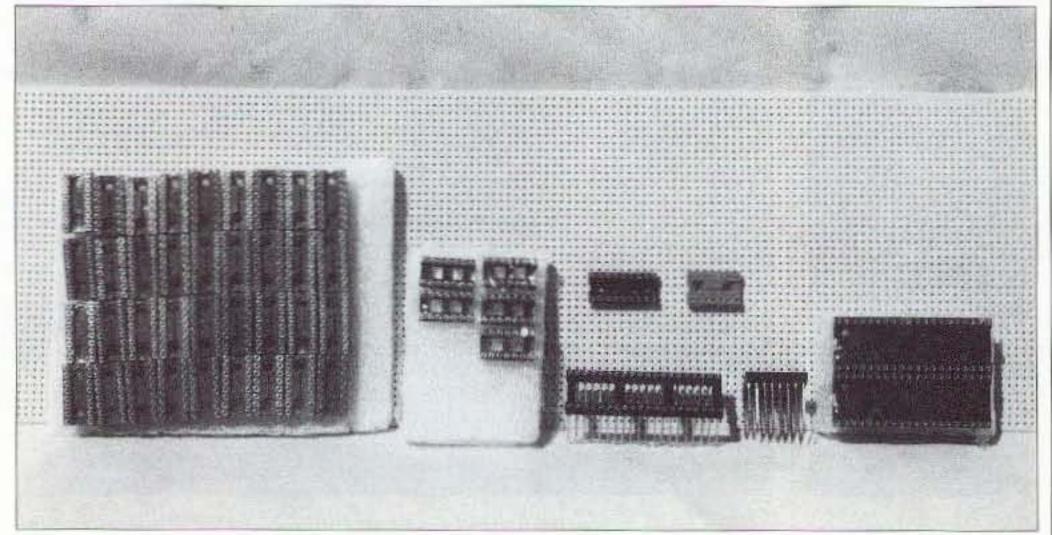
Photo A. CEM-I perforated PC board and machined pin wire-wrap sockets.
